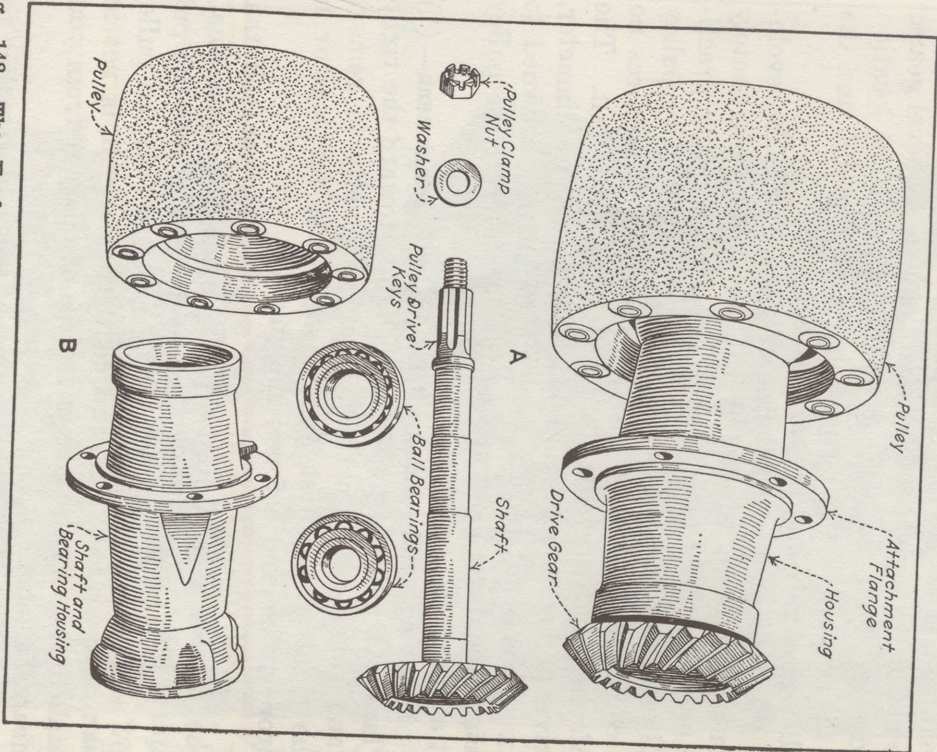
The Fordson Tractor Power Take-off or Driving Pulley Attachment Shown at A, and the Various Parts Used in This Assembly are Depicted at B.
